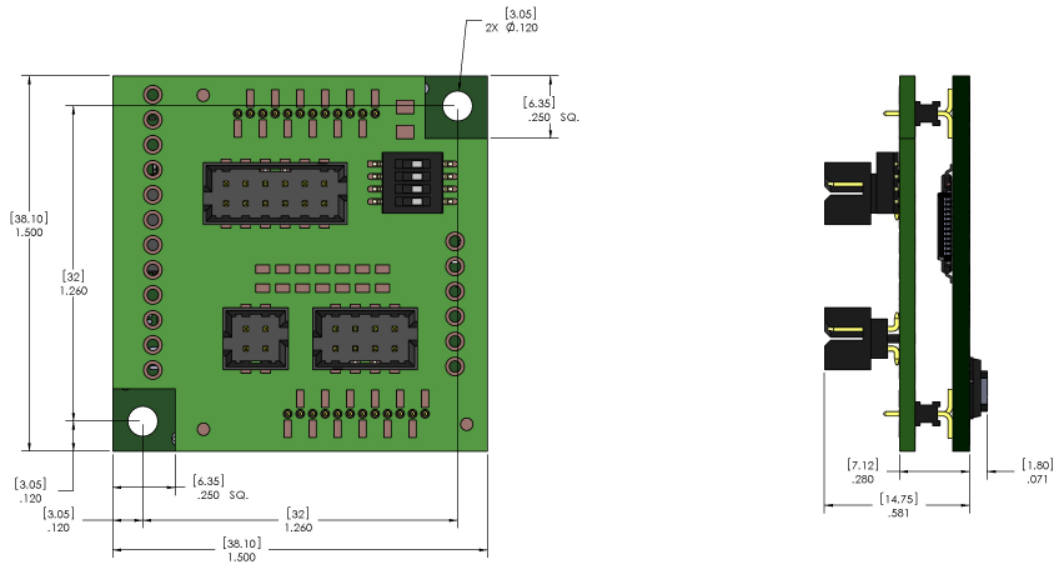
AZBE/H/D10A4 Mounting Dimensions (inches and [mm])
